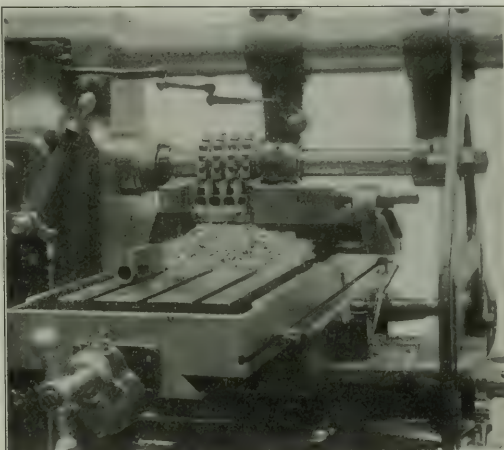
No. 4 Horizontal Cincinnati Milling Machine.
